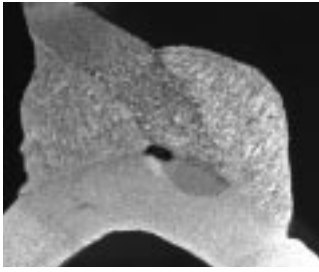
Strip attached to car seat rail, welded with 1.2 mm solid wire. Welding time 16.5 seconds.
